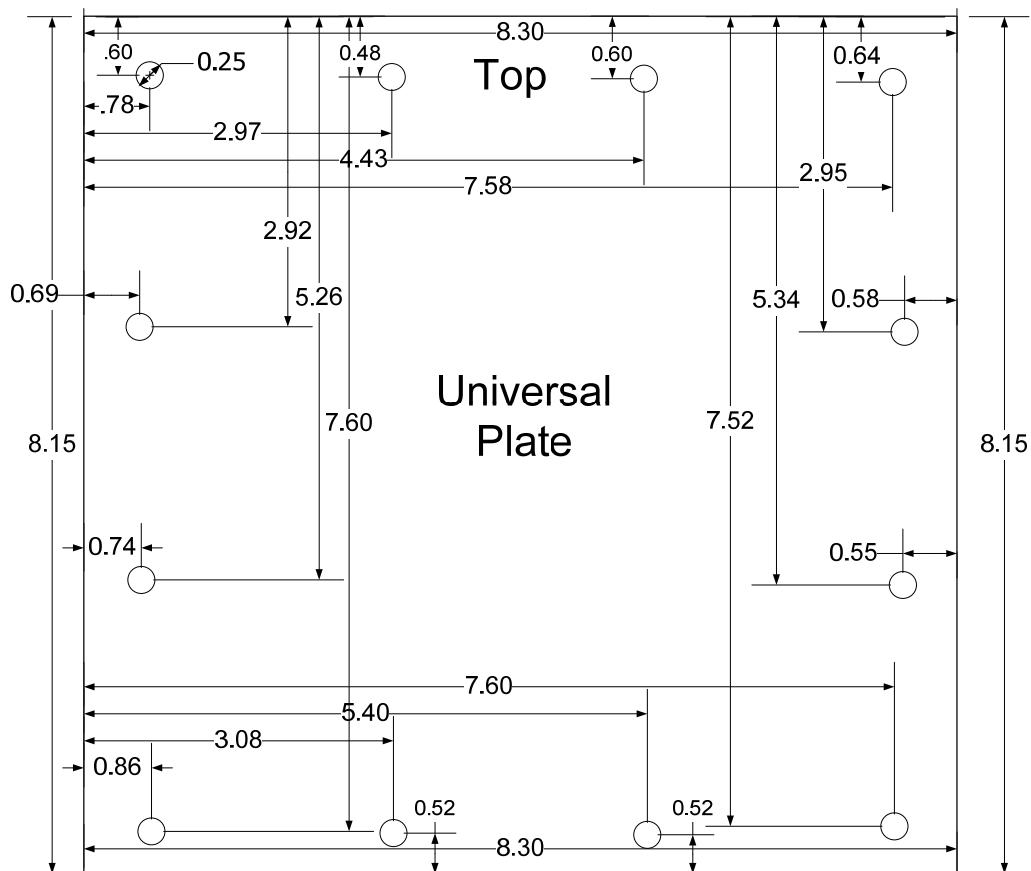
Room 23M Universal Plate Dimensions (Plate #2)
